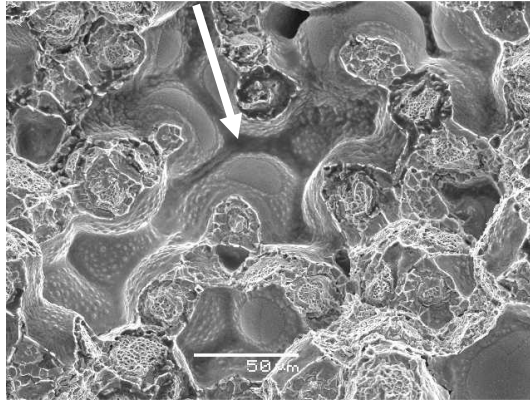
Partially filled pores in a fracture surface of tin infiltrated bronze.
